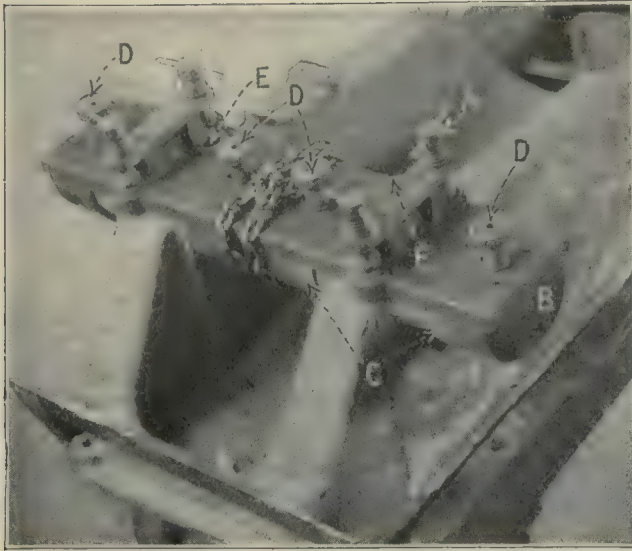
BABBITTING CRANKSHAFT BEARINGS
